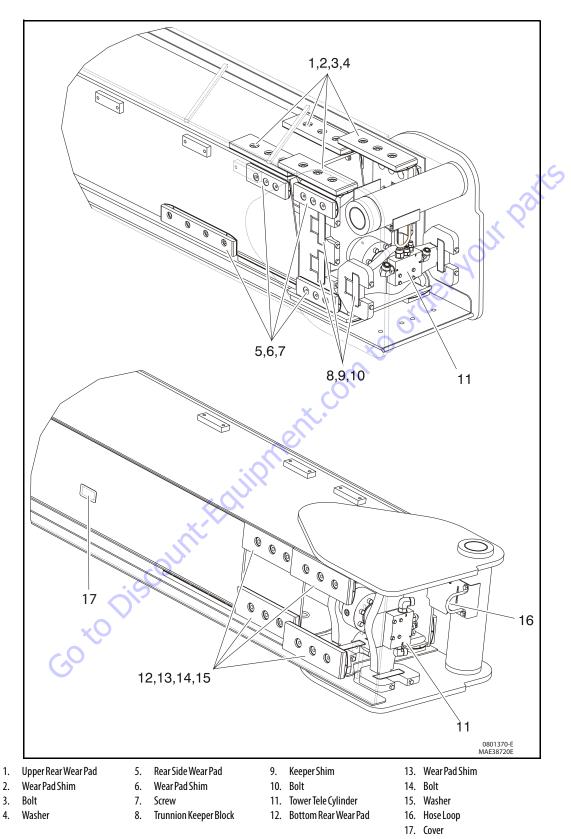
Tower Boom Assembly - Sheet 3 of 3
